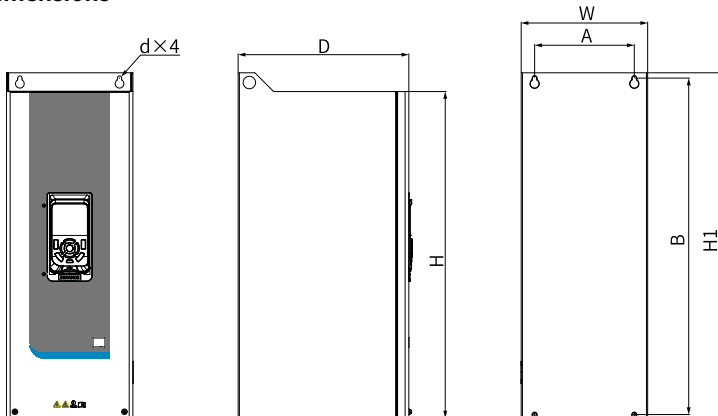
Outline dimensions and mounting dimensions of S5 models
